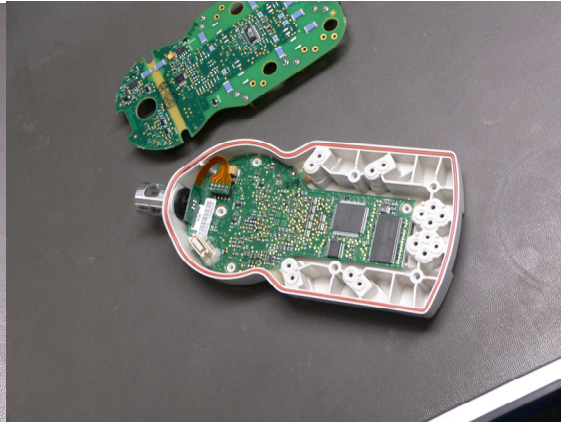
circuit boards inside Cardiograph-keyboard PCA
